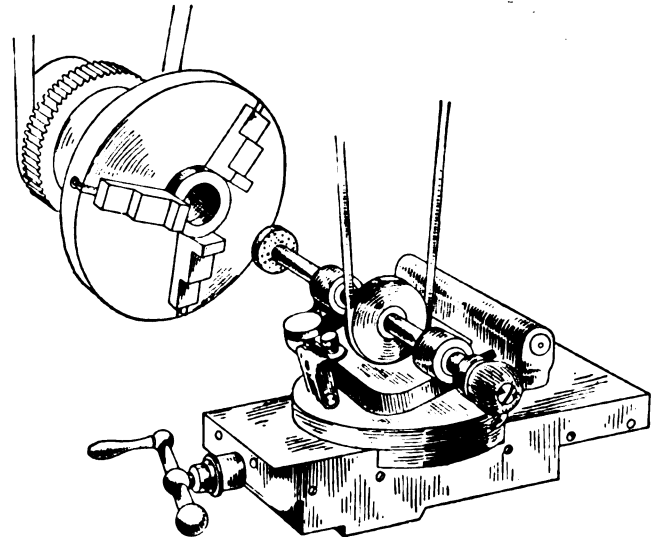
TRAVERSE SPINDLE GRINDER ATTACHED TO THE ENGINE LATHE
